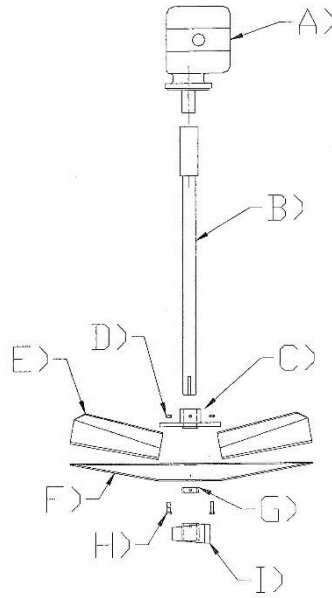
Exploded view of spinner assembly (Chandler Spreaders, 2013).
